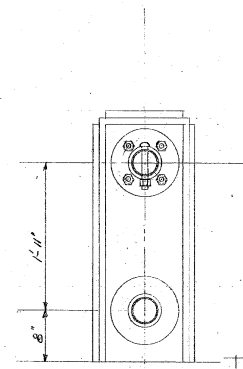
DETAIL OF BUILT-UP RAIL SECTION [4 REQ'D]
